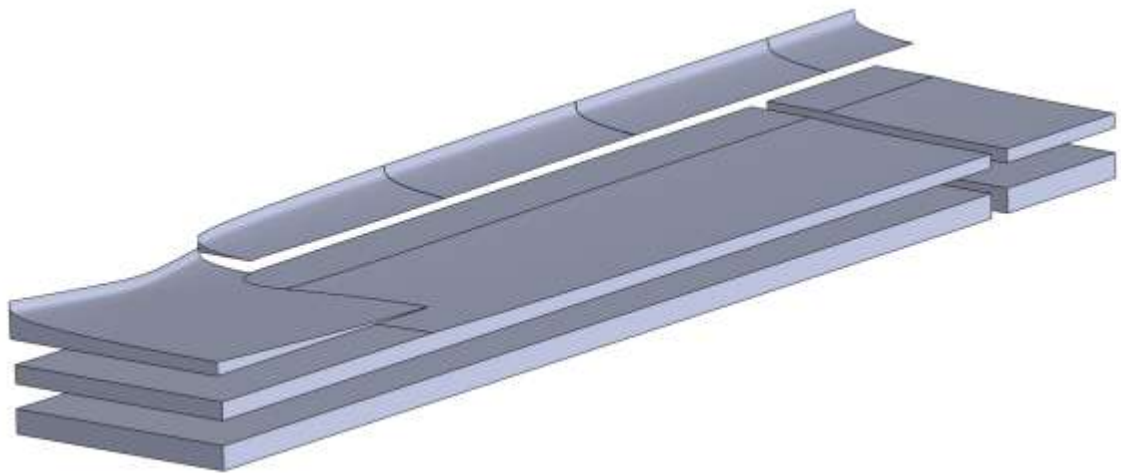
Exploded view of the lower wall liner, downstream test surface quadrant
